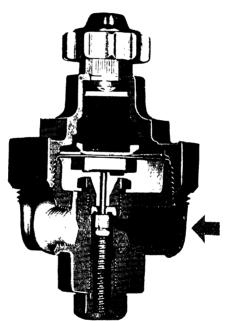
The cylinder pressure (red) enters the regulator at the right. The valve mechanism is controlled by a stem which touches, but is not connected to the diaphragm. The low pressure gas (yellow) is the gas supplied to the torch. The adjustment screw (top) is used to vary the pressure supplied to the torch
